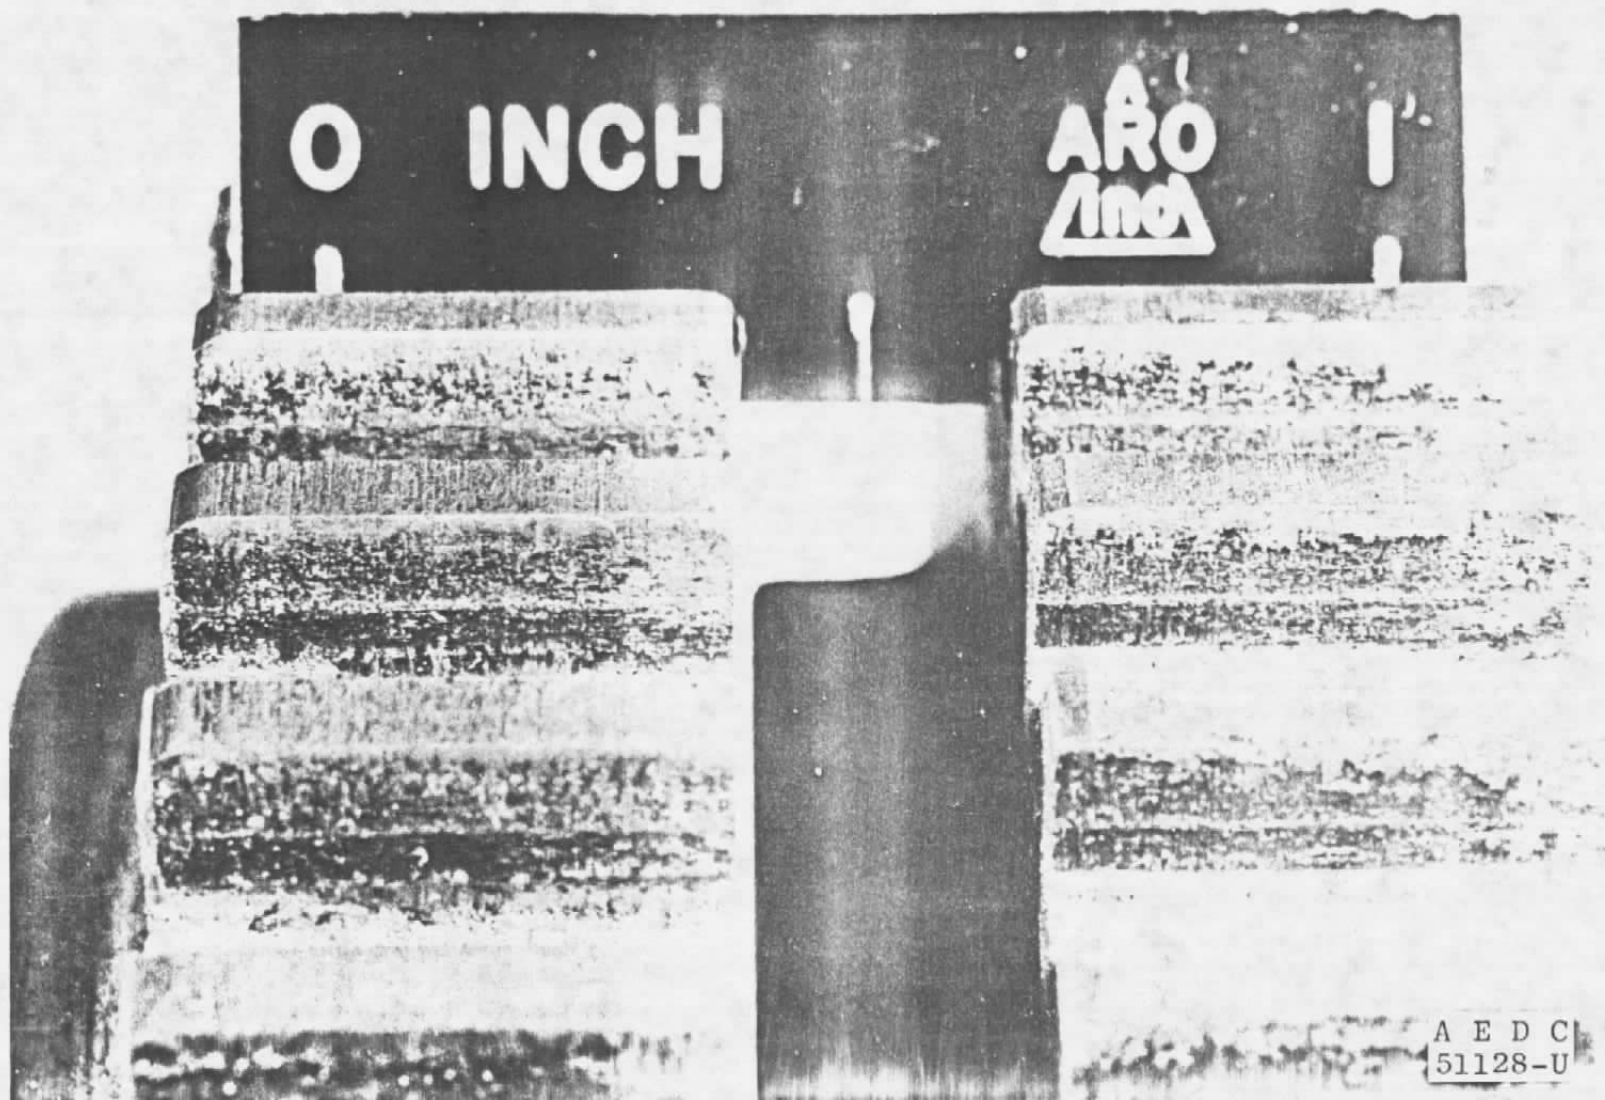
12-D.P. Nodular Iron Gears after 17 hr in Test 2
